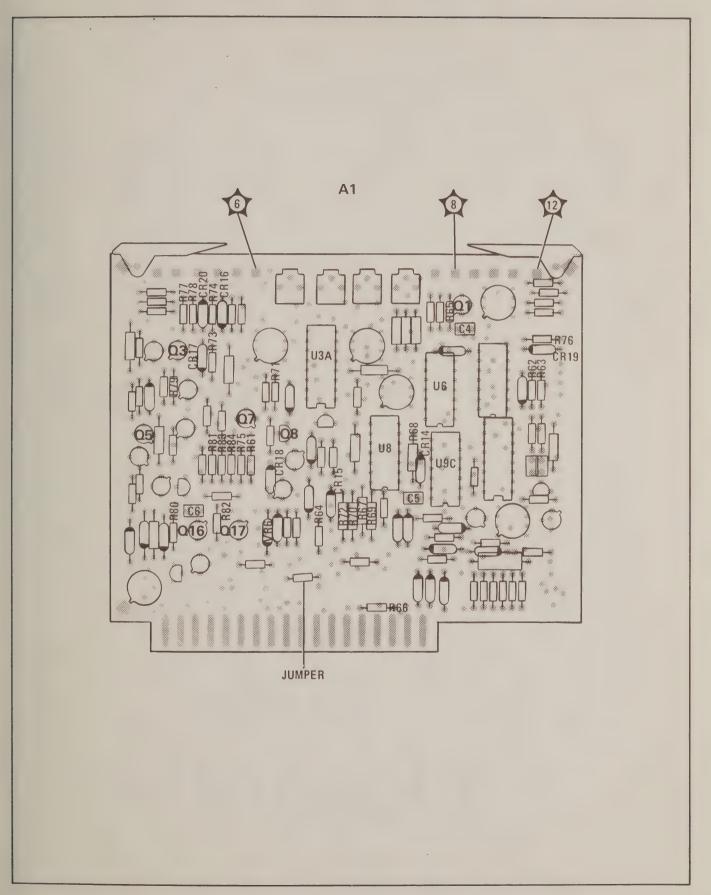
A1 Sweep Generator Assembly, Component Locations (CHANGE C) (2 of 2)
